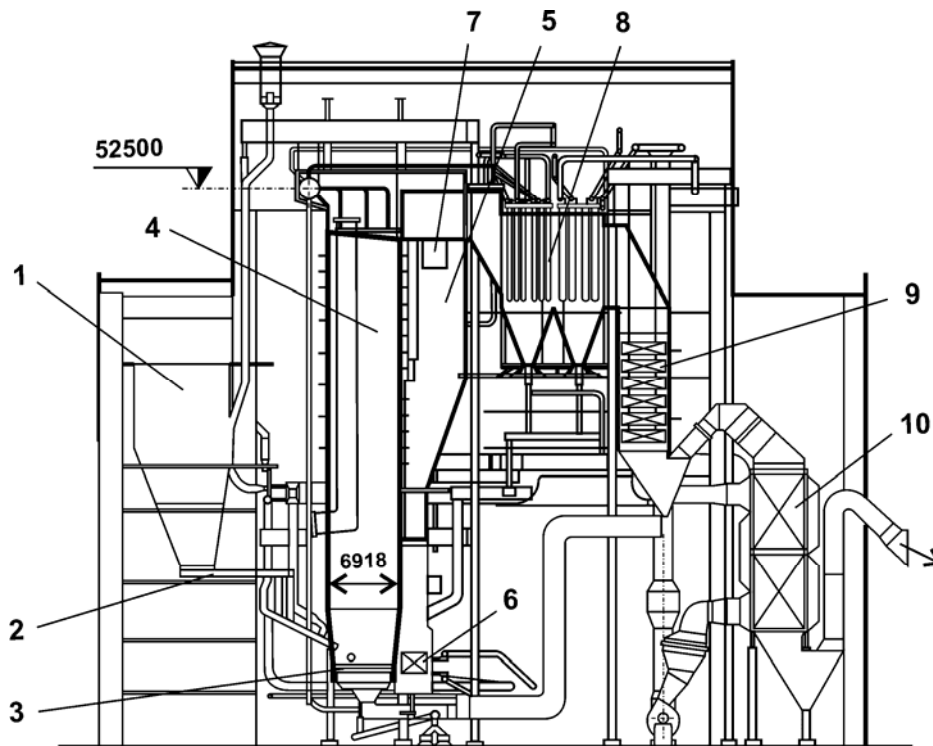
Oil shale fired CFB boiler. 1 – raw fuel bunker, 2 – fuel feeder, 3 – grate, 4 – furnace chamber, 5 – separating chamber, 6 – fluidized bed internal heat exchanger, 7 – separator, 8 – superheater, 9 – economizer, 10 – air preheater [3].
